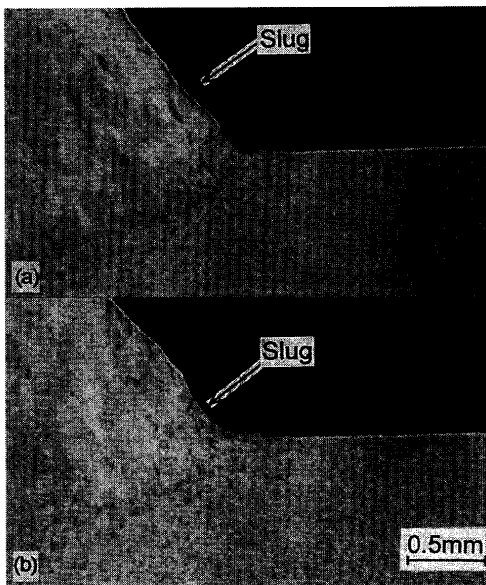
View of a metallographic cut of toe of bead-on-plate welded plate.
